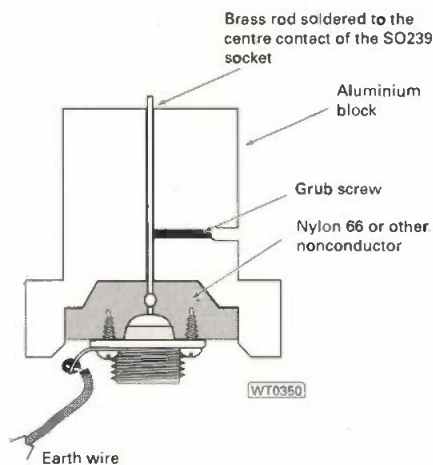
The baseplate is made from a block of aluminium with an insert of Nylon 66 (or other insulating material) for mounting the SO239 socket on. The outer of the socket must not touch the metal section, but must be taken to a good earth point.
